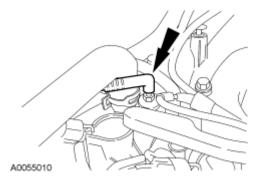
Ground Wire Courtesy of FORD MOTOR CO.
